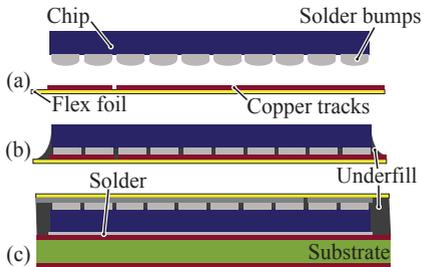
Flip-chip integration principle where in (a) the chip with solder bumps is placed on a flexfoil. (b) Soldering of the bumps and underfill. (c) Soldering of the chip onto a substrate.
